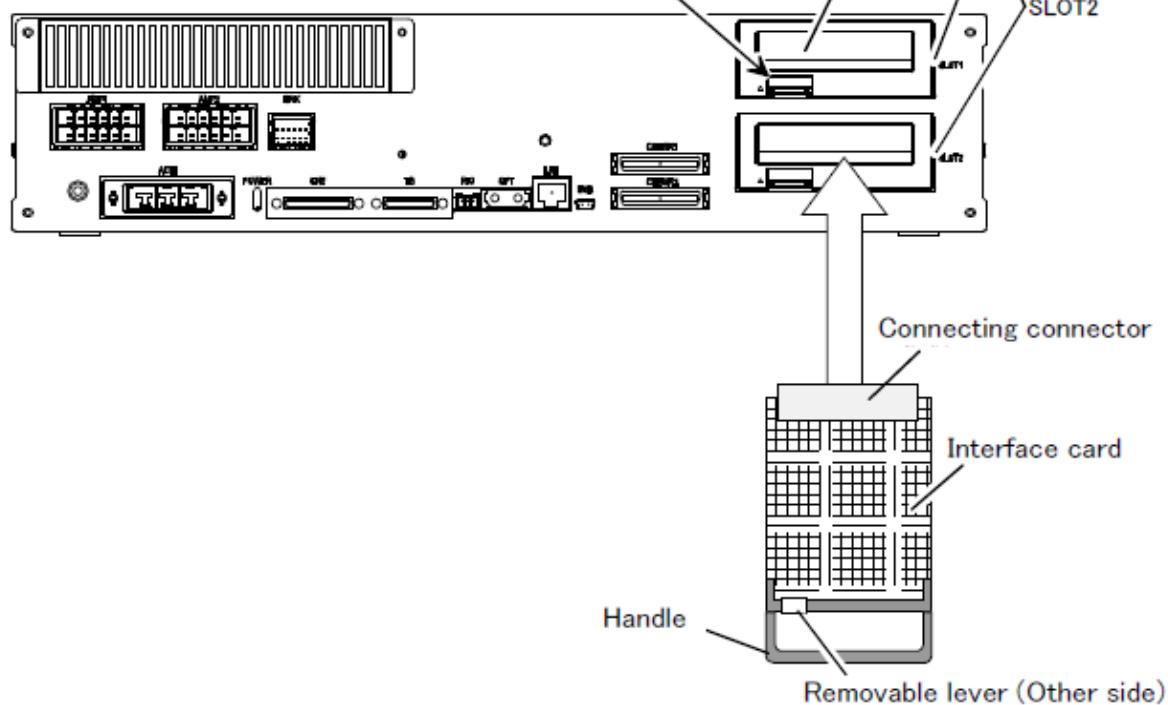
Mounting of the 2D-TZ535 card (CR750-D/CR751-D controller)
